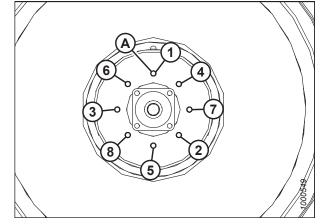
Forked Caster Wheel Nut Tightening Sequence
